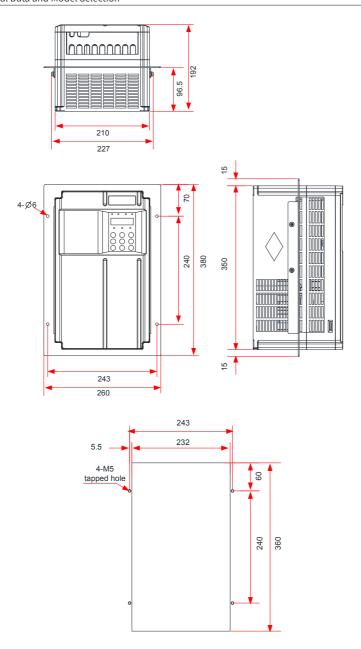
Mounting bracket dimensions and hole spacing for 18.5–22 kW AC drive models
